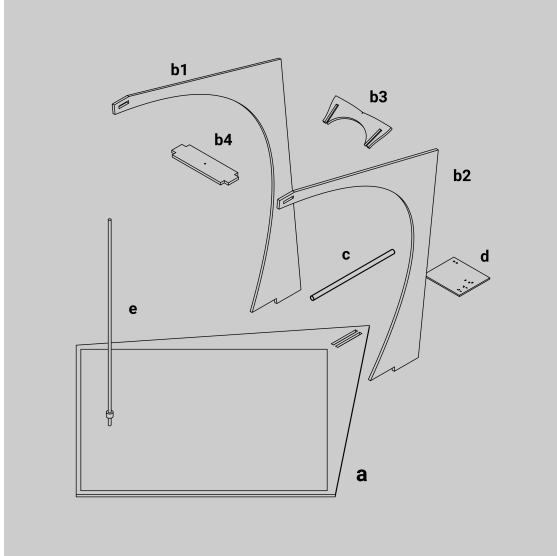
Exploded diagram of the initial instrument: a - base; b - arc structure; c - separator; d - PCB; e - pendant
